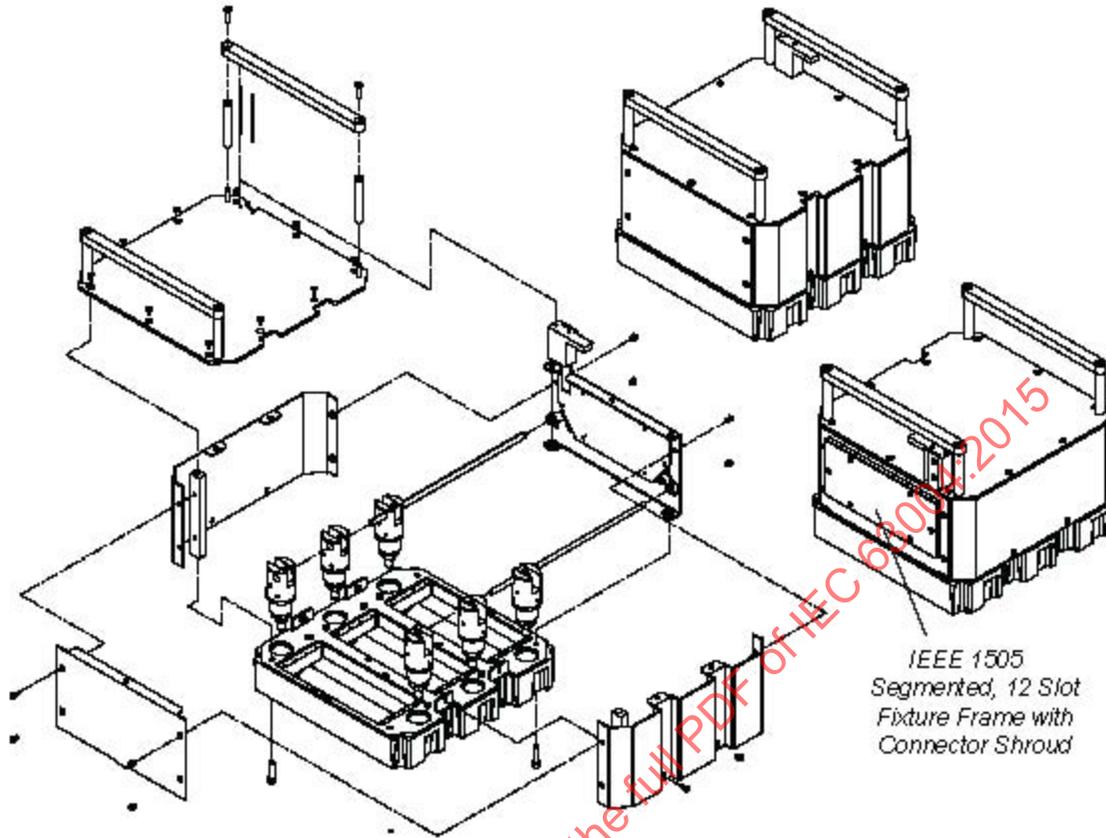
Segmented 3 x 4 slot framework fixture layout design, perspective view, with connector mount spacing at 15.24 mm (0.60 in), slot spacings with frame rib at 76.2 mm (3.0 in) spacings
